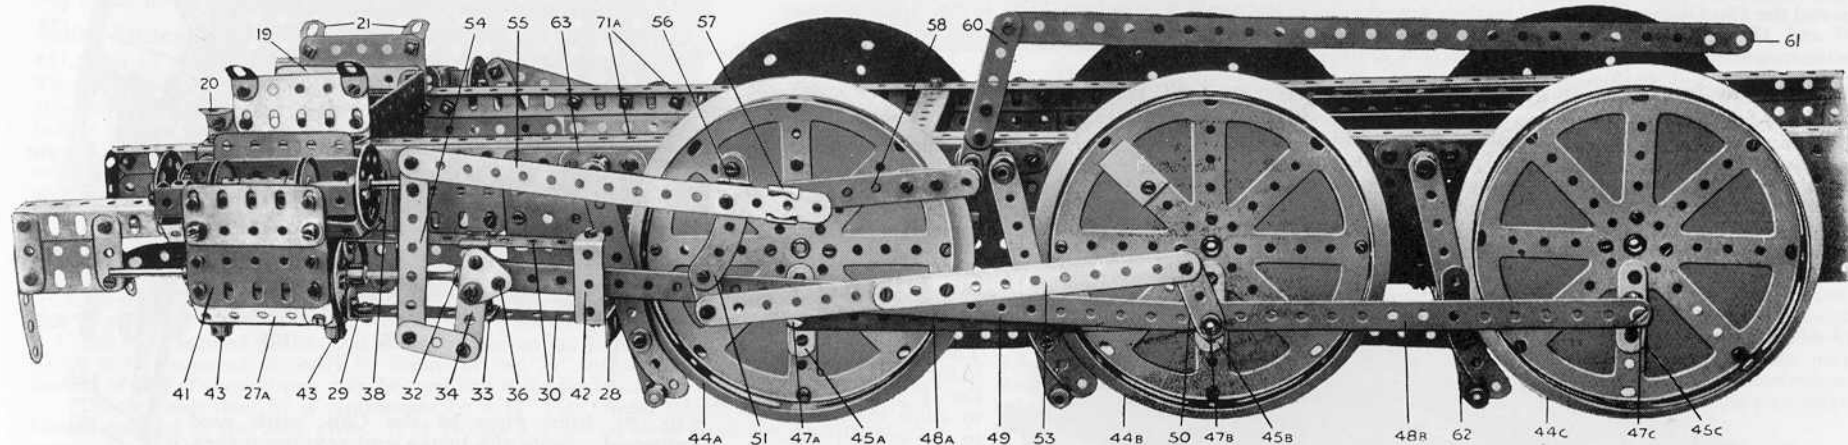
The complete Chassis. This illustration clearly shows the arrangement of the Valve Gear.
